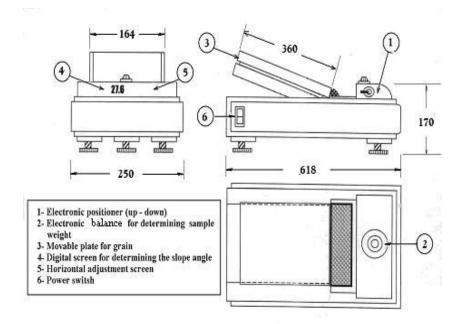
Elevation, plan and side view of the digital equipment used for measuring the friction coefficient
